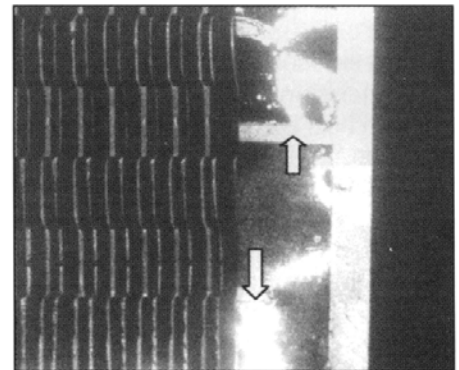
"Virgin" specimen with a piece of the offset fin tack-welded over two gaps between MBF-20 ribbons.
